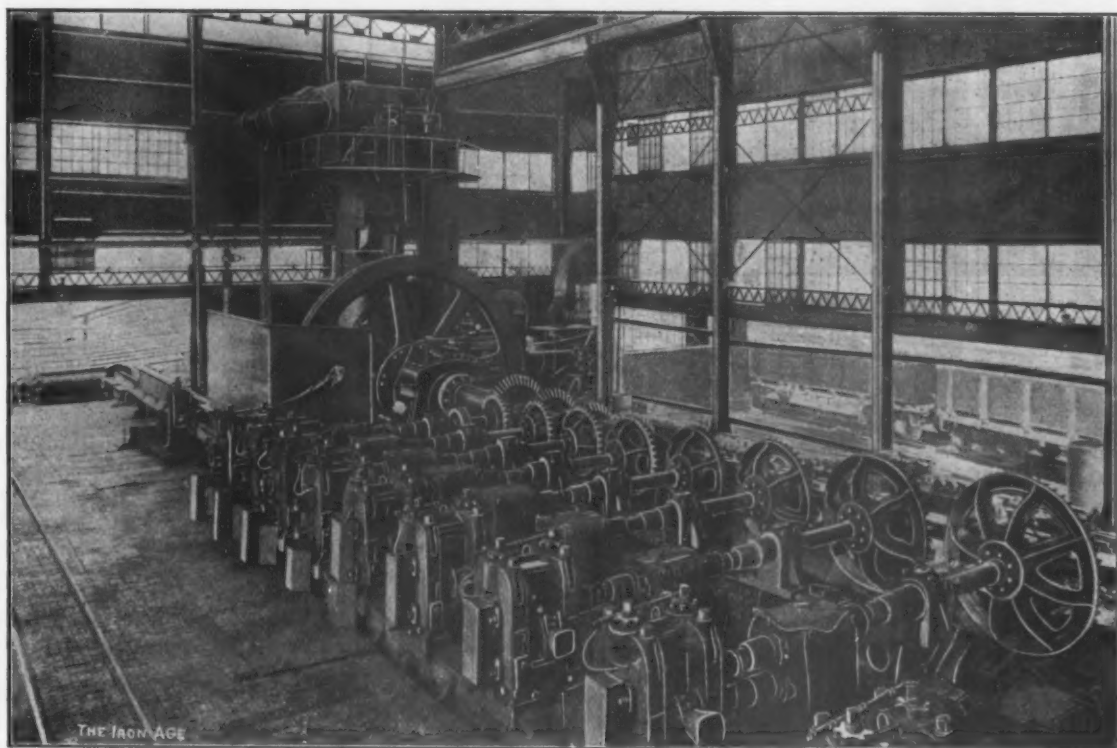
View of 14-Inch Continuous Mill and Engine, Looking Toward Entering End of Mill.
